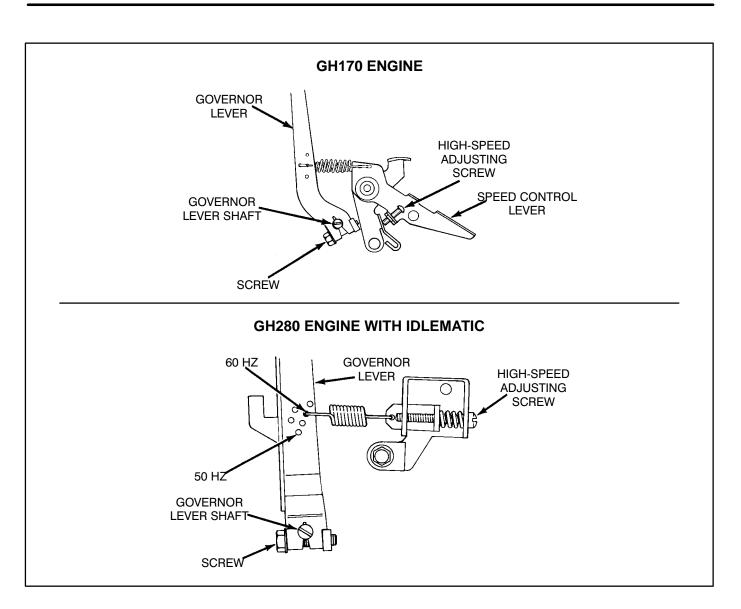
GOVERNOR/THROTTLE ADJUSTMENTS, GH170 AND GH280 ENGINES
